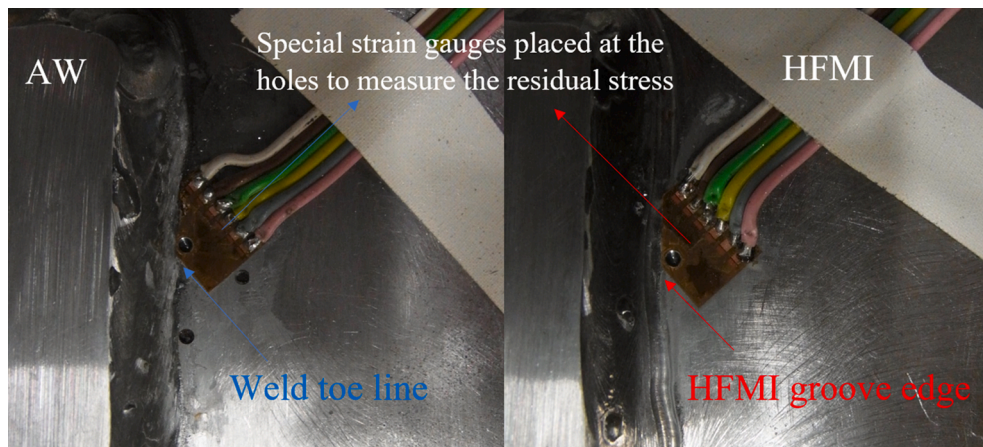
Hole drilling on as-welded and HFMI-treated specimens.
